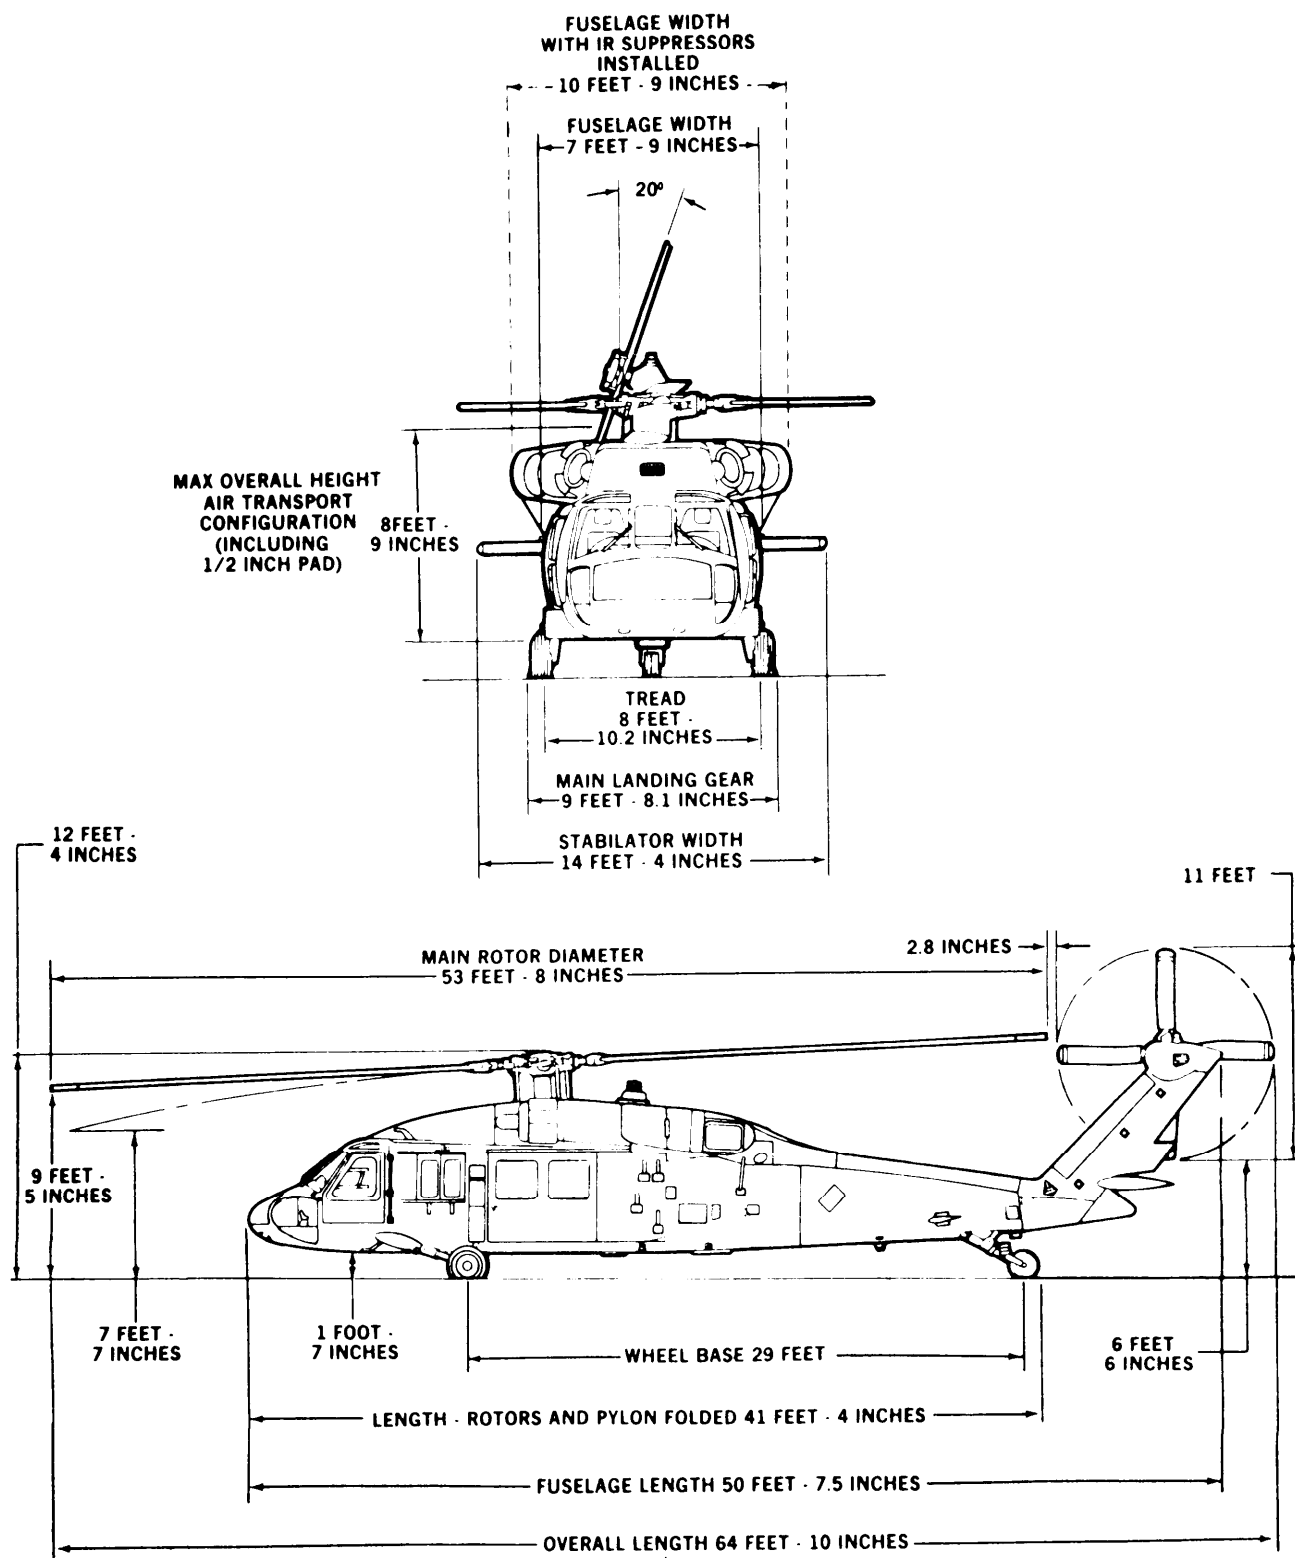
Principal dimensions, UH-60A (front and side views).
